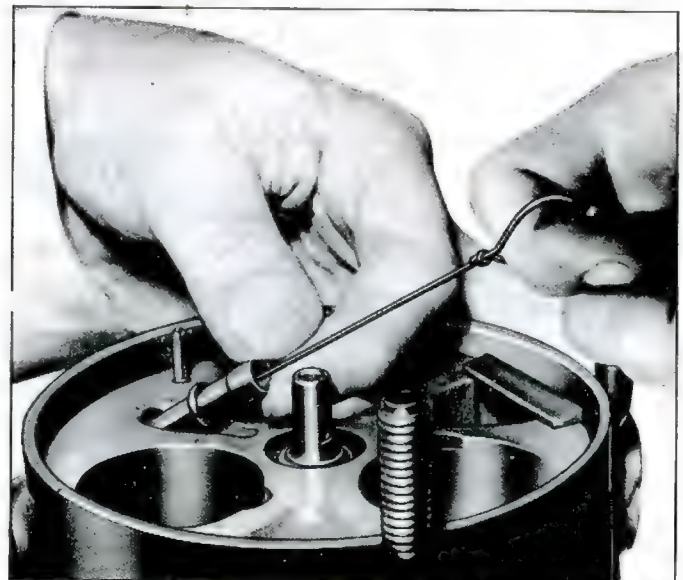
Removing Oil Inlet Tube and "O" Ring
